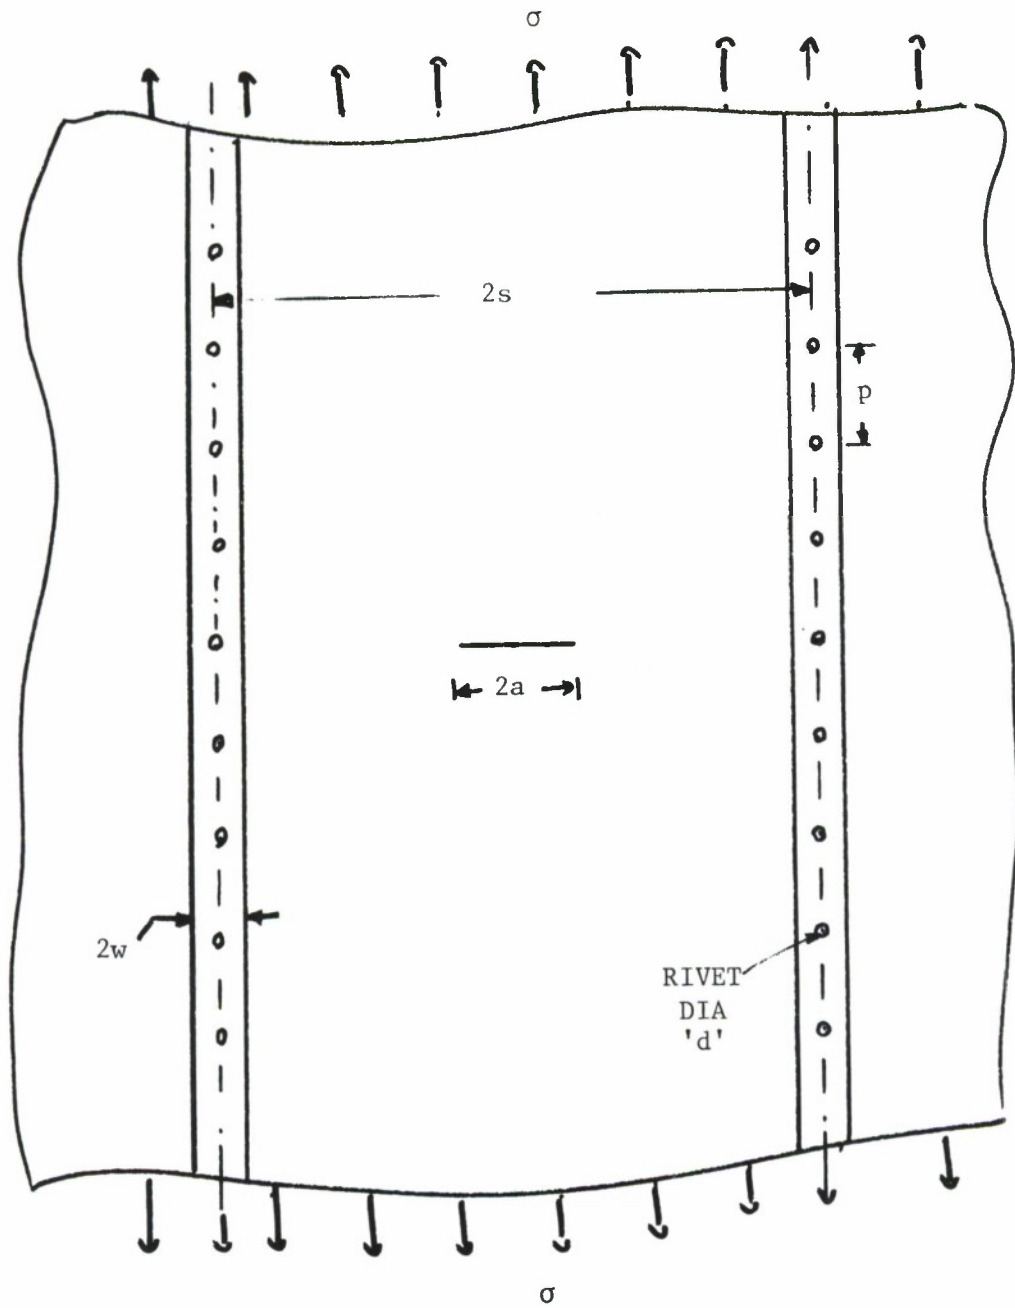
Riveted Panel with a Central Crack Between Two Stringers.
